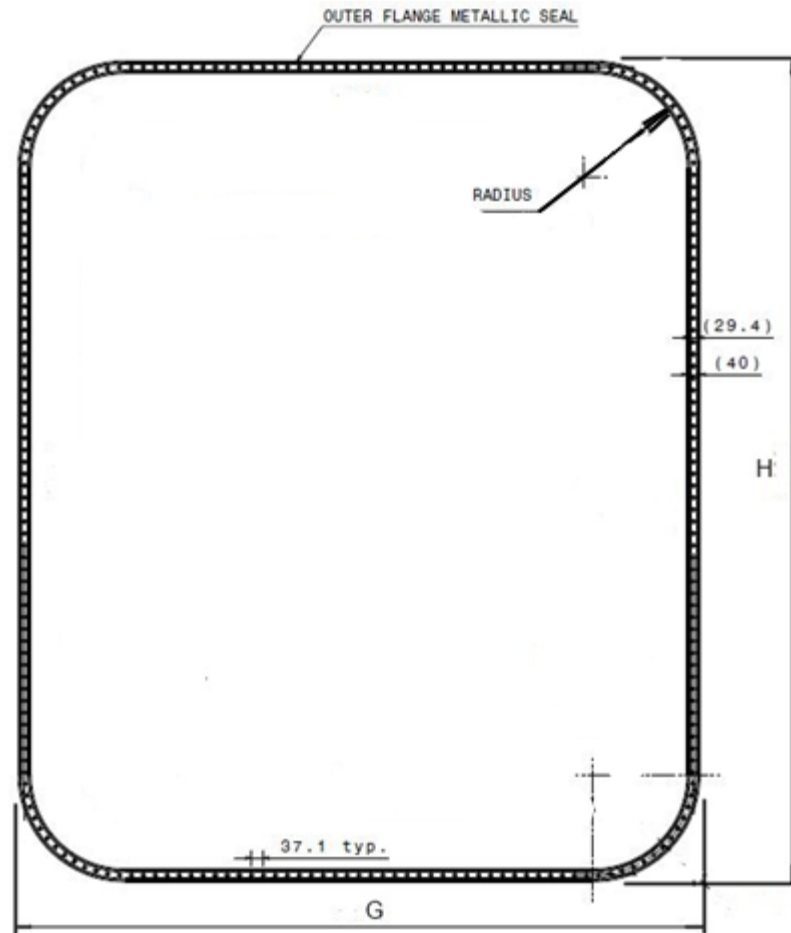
Seal Dimensions Sketch – Adapted from Drg 036981[17]
